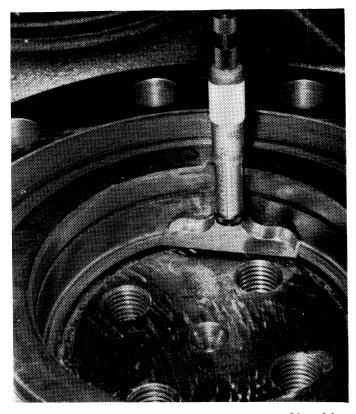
Measuring Gap Between Shoulder in Bore of Output Flange and End of Output Shaft.
